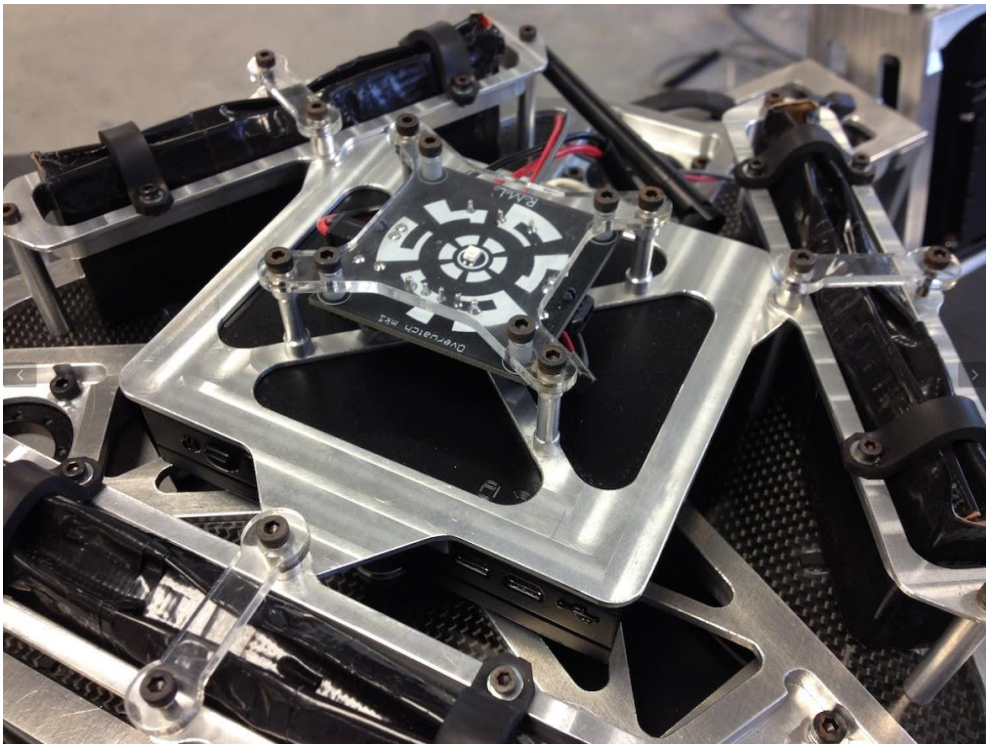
Completed View of Bottom Side of Body and Hip Assembly
